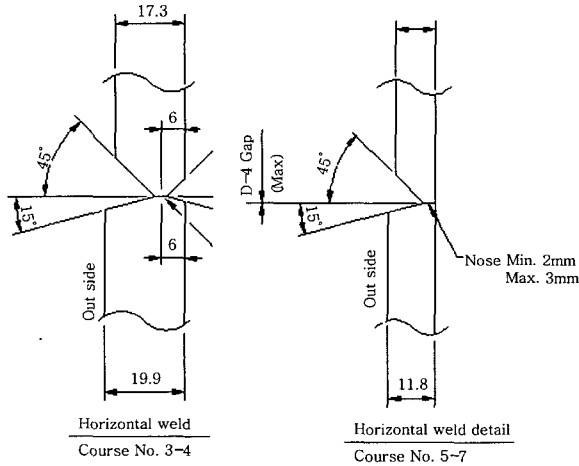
Weld joint shape for horizontal weld of inner tank wall¹⁷⁾
